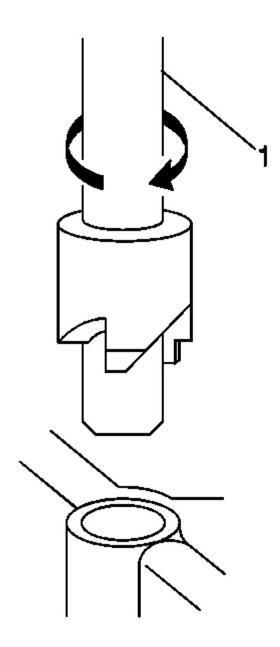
View Of Counterbore Drill Courtesy of GENERAL MOTORS CORP.
